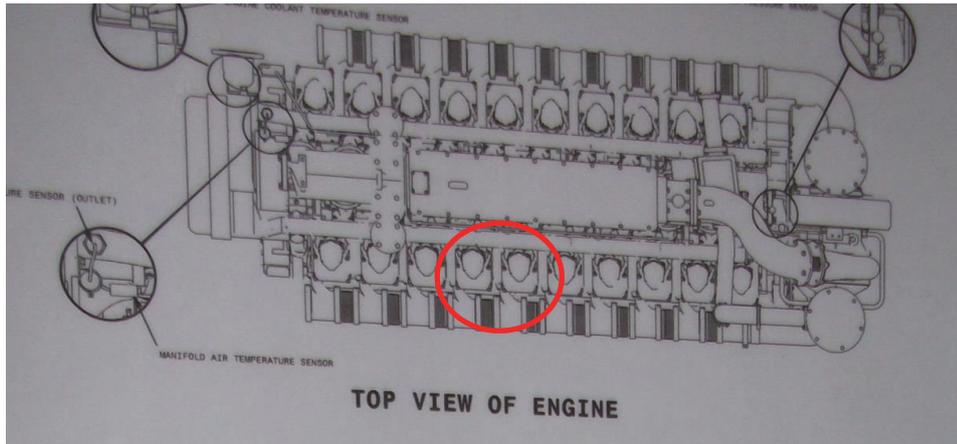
AE sensor mounting location (cylinder head 7 and 9)
